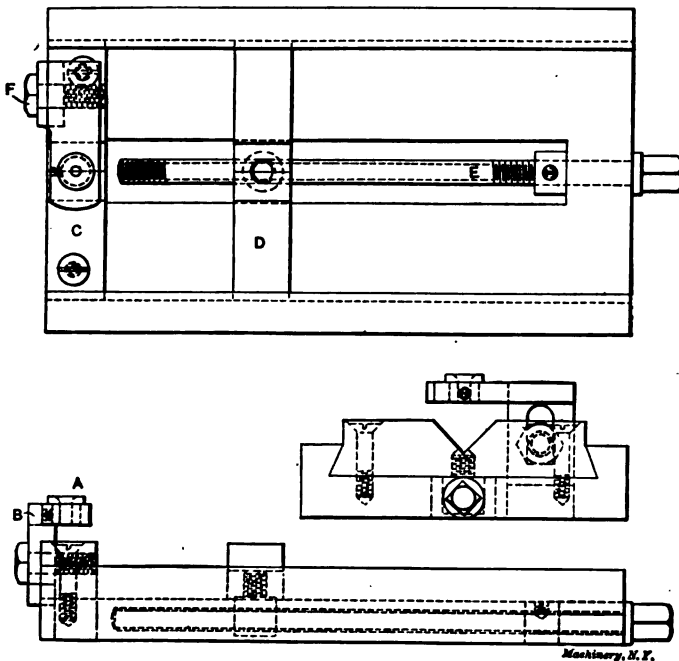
Jig for Drilling Holes in Studs and Shafts
